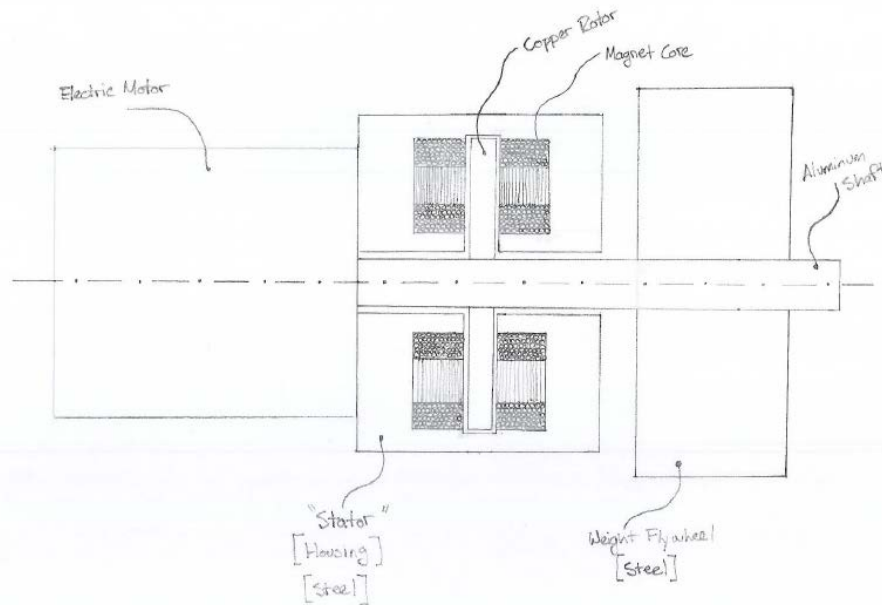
Final proposed design of electric motor and eddy current brake assembly (cut away view) (repeated).
